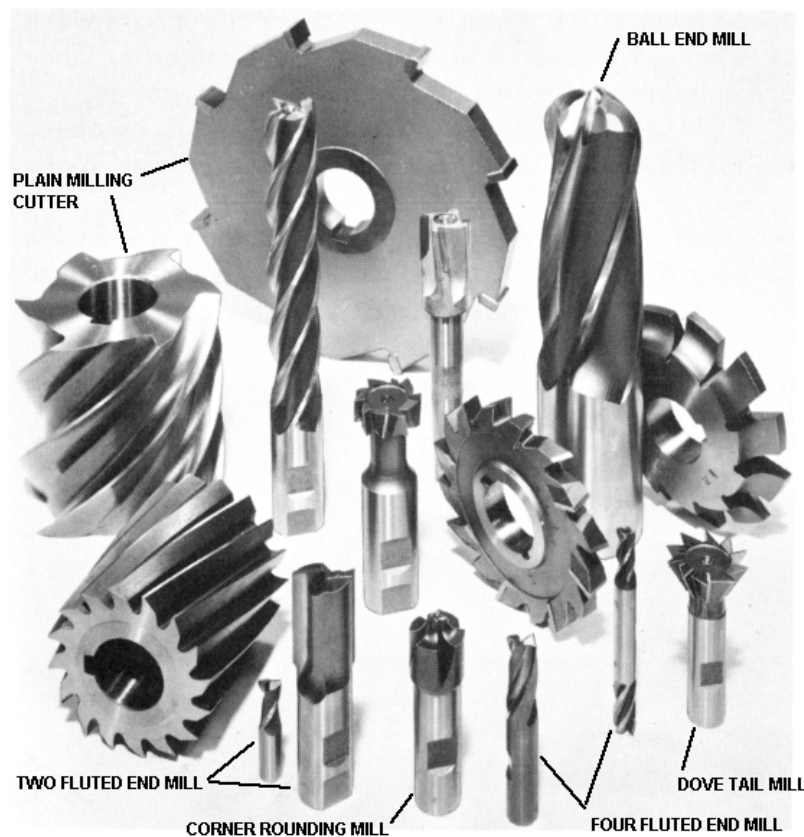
Examples of milling cutters used for various milling operations. The drill-like (shank type) cutters are for use in vertical mills, the wider cutters (all those with KEYWAYS) for use on the arbor of a horizontal mill.
